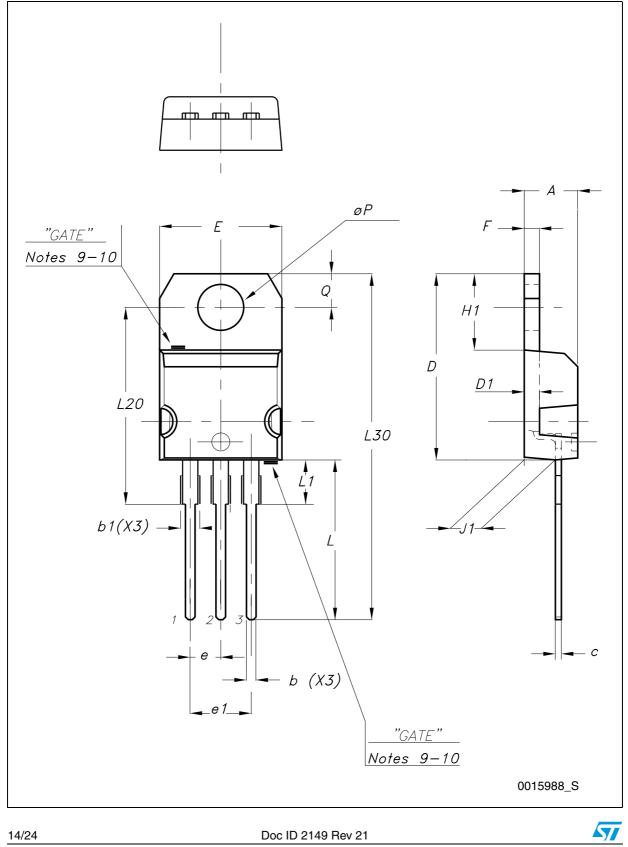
Drawing dimension TO-220 (type STD-ST Dual Gauge)
